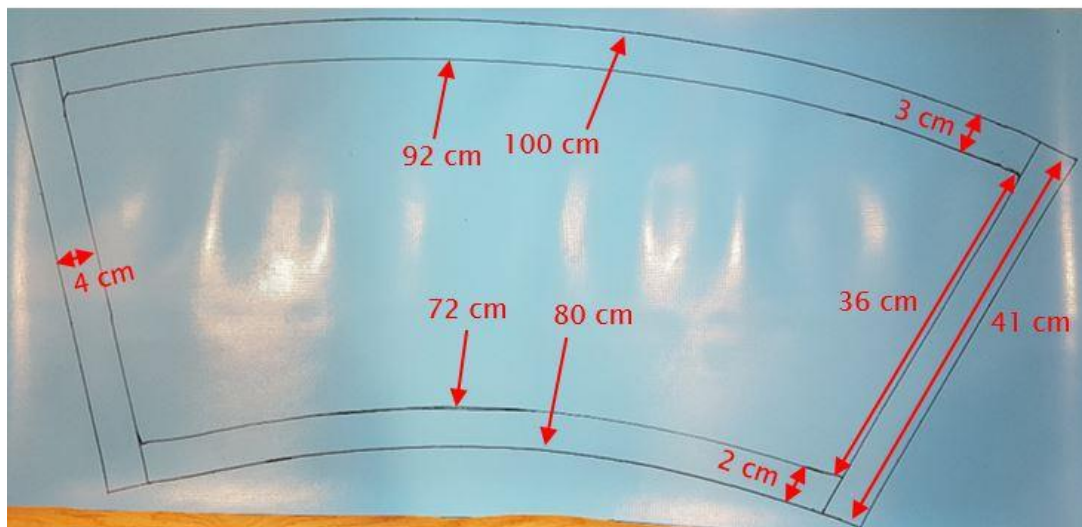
Upper and bottom layer cutting model of the safety pads prototype.
